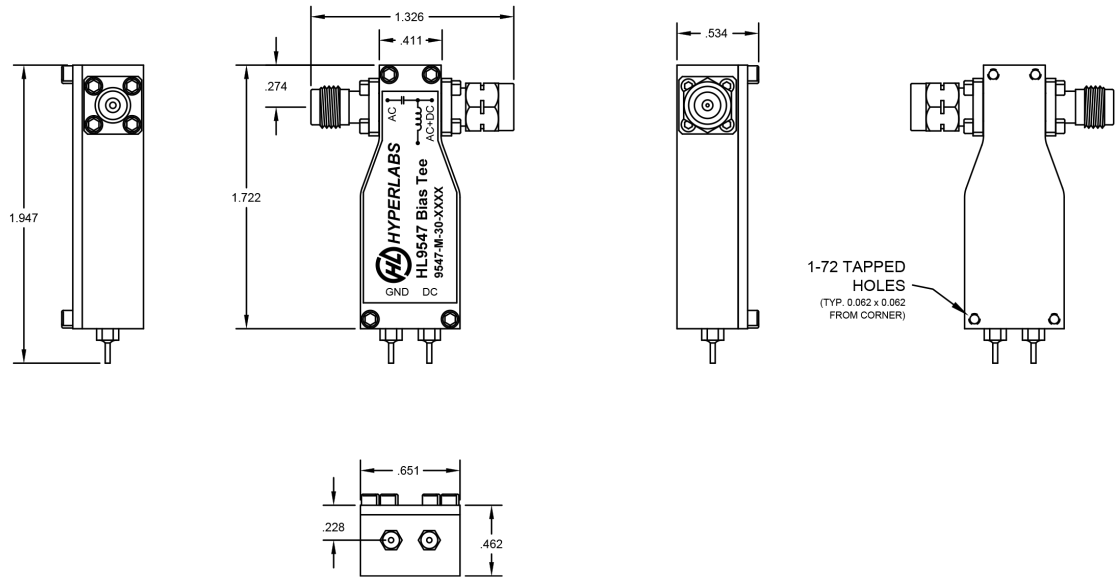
HL9547 with DC bias pins Mechanical Drawing
